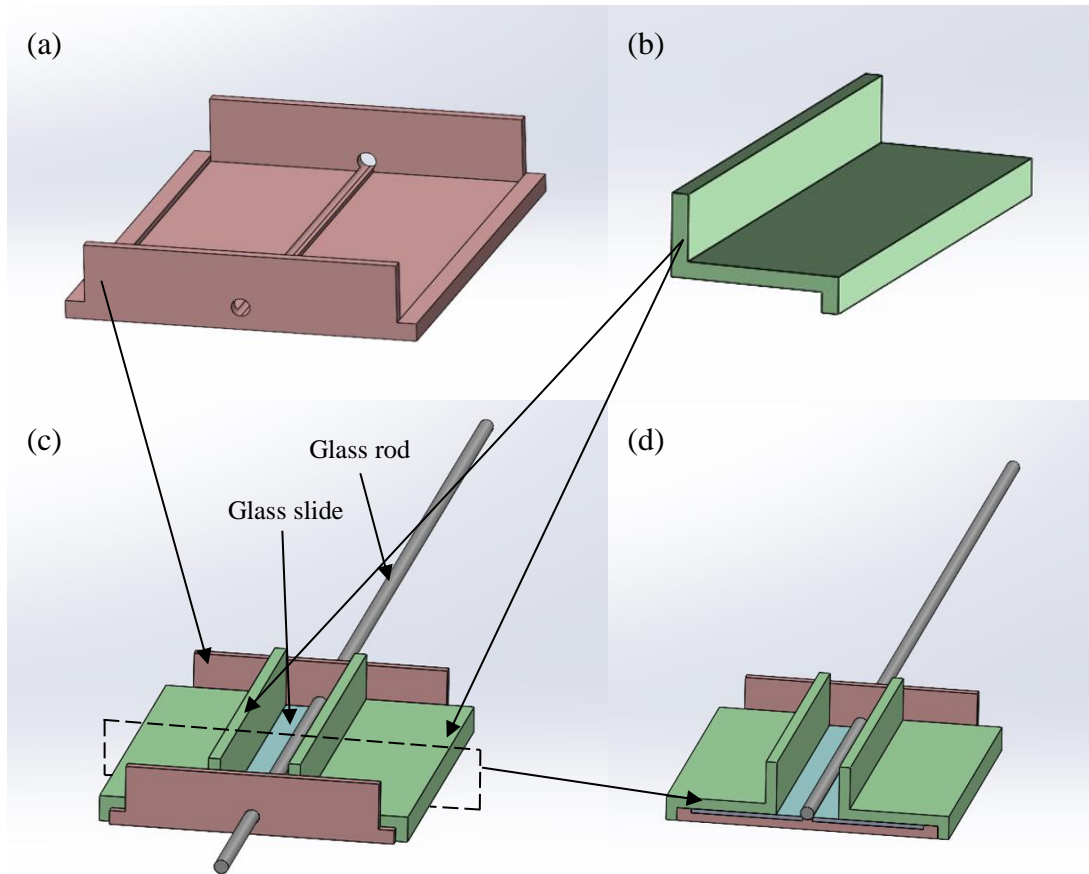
Mold components to create the PU plastic mold. (a) Main base to hold one glass slide on each side of the stand that holds the glass rod. (b) Wall that is placed on top on the slide and secured on the edge of the base. (c) Assembled mold, where the PU plastic will be casted in the cavity made by the green walls, rod, and slides. (d) Cross-sectional view of the assembled mold.
